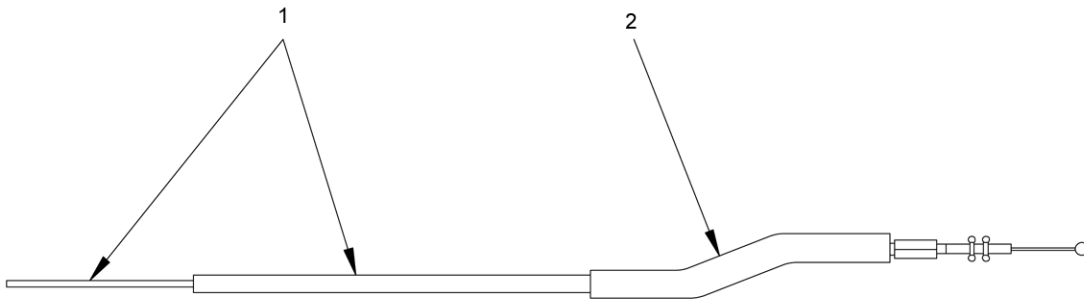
LOP Engine Shutdown Cable Assembly (MEP-531A/501A).
